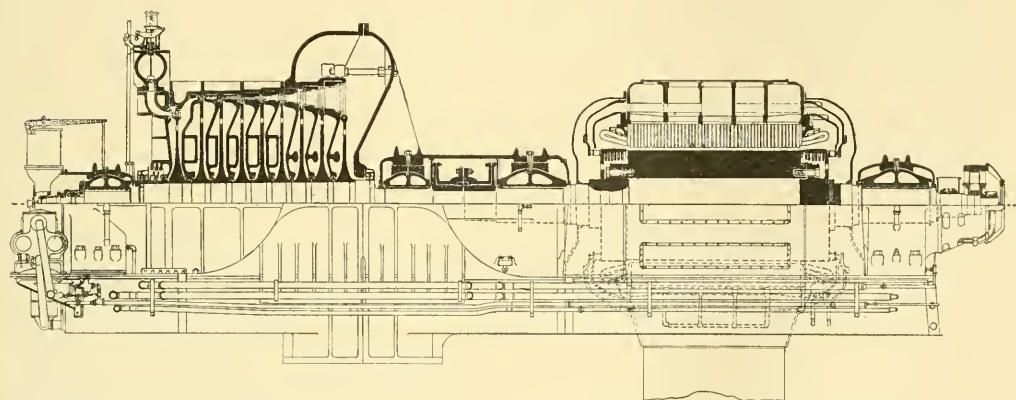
SECTIONAL VIEW OF ONE OF THE 25,000 K. V. A. TURBO-GENERATOR UNITS
